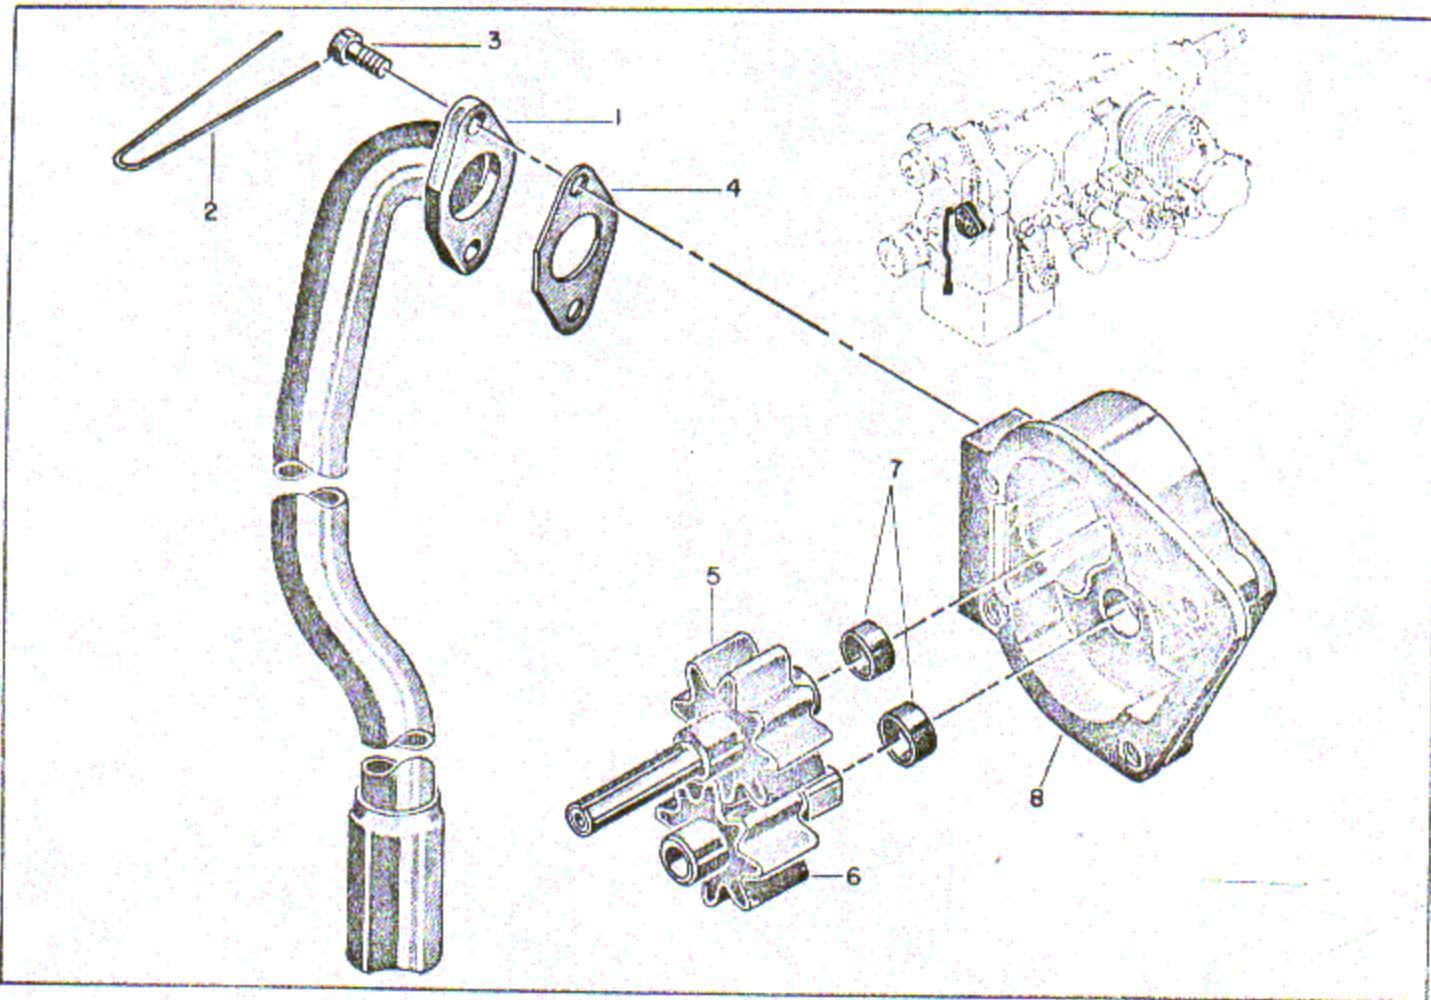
Exploded Parts View of O-470-7 Oil Pump Assembly
